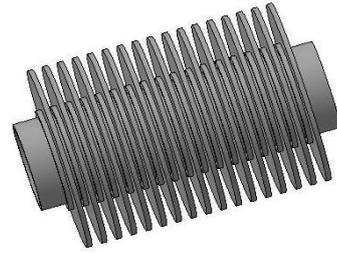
Cooler tube finning option, which can be recommended when switching to air cooling.
